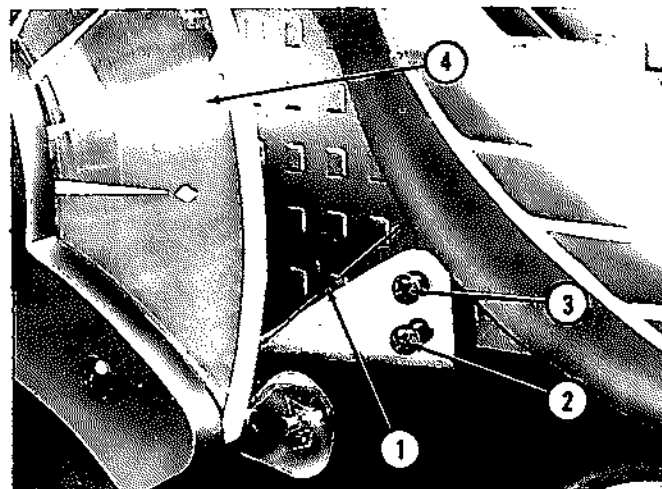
RECORD GUIDE AND SAFETY SWITCH ADJUSTMENT
